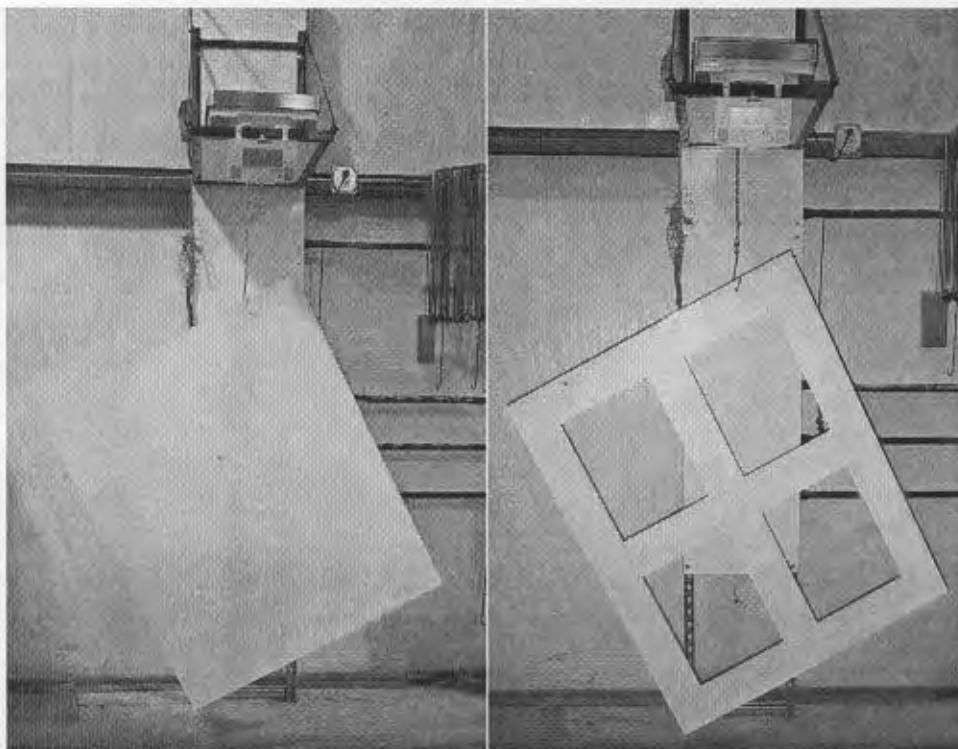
Test Parts Weighing Procedure Using the 22,000 g Bottom Load Electronic Balance
